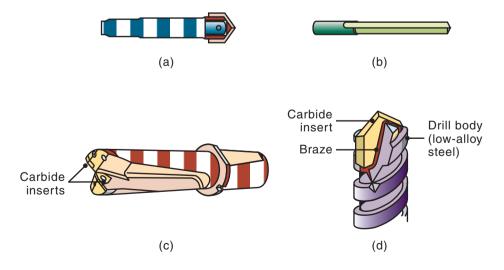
Various types of drills. (a) Spade drill; (b) straight-flute drill; (c) drill with indexable carbide inserts; (d) drill with brazed-carbide tip.
